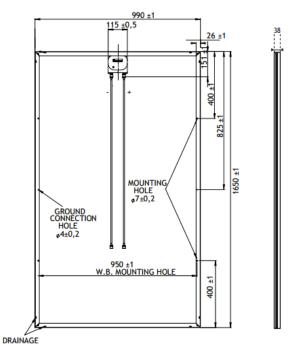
Mechanical drawing of the SLA/SSA module showing the mounting holes, the drainage holes, and the ground connection holes
